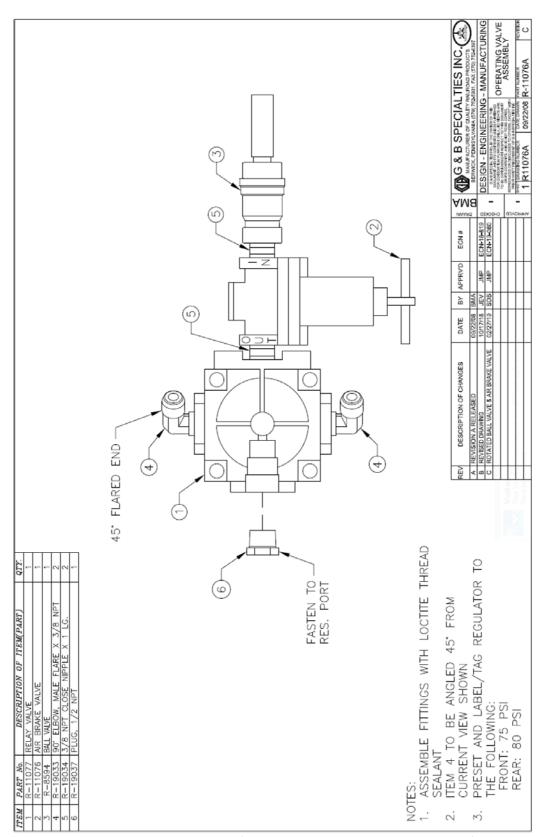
R-11076A (Air Brake Control Valve Assembly)
